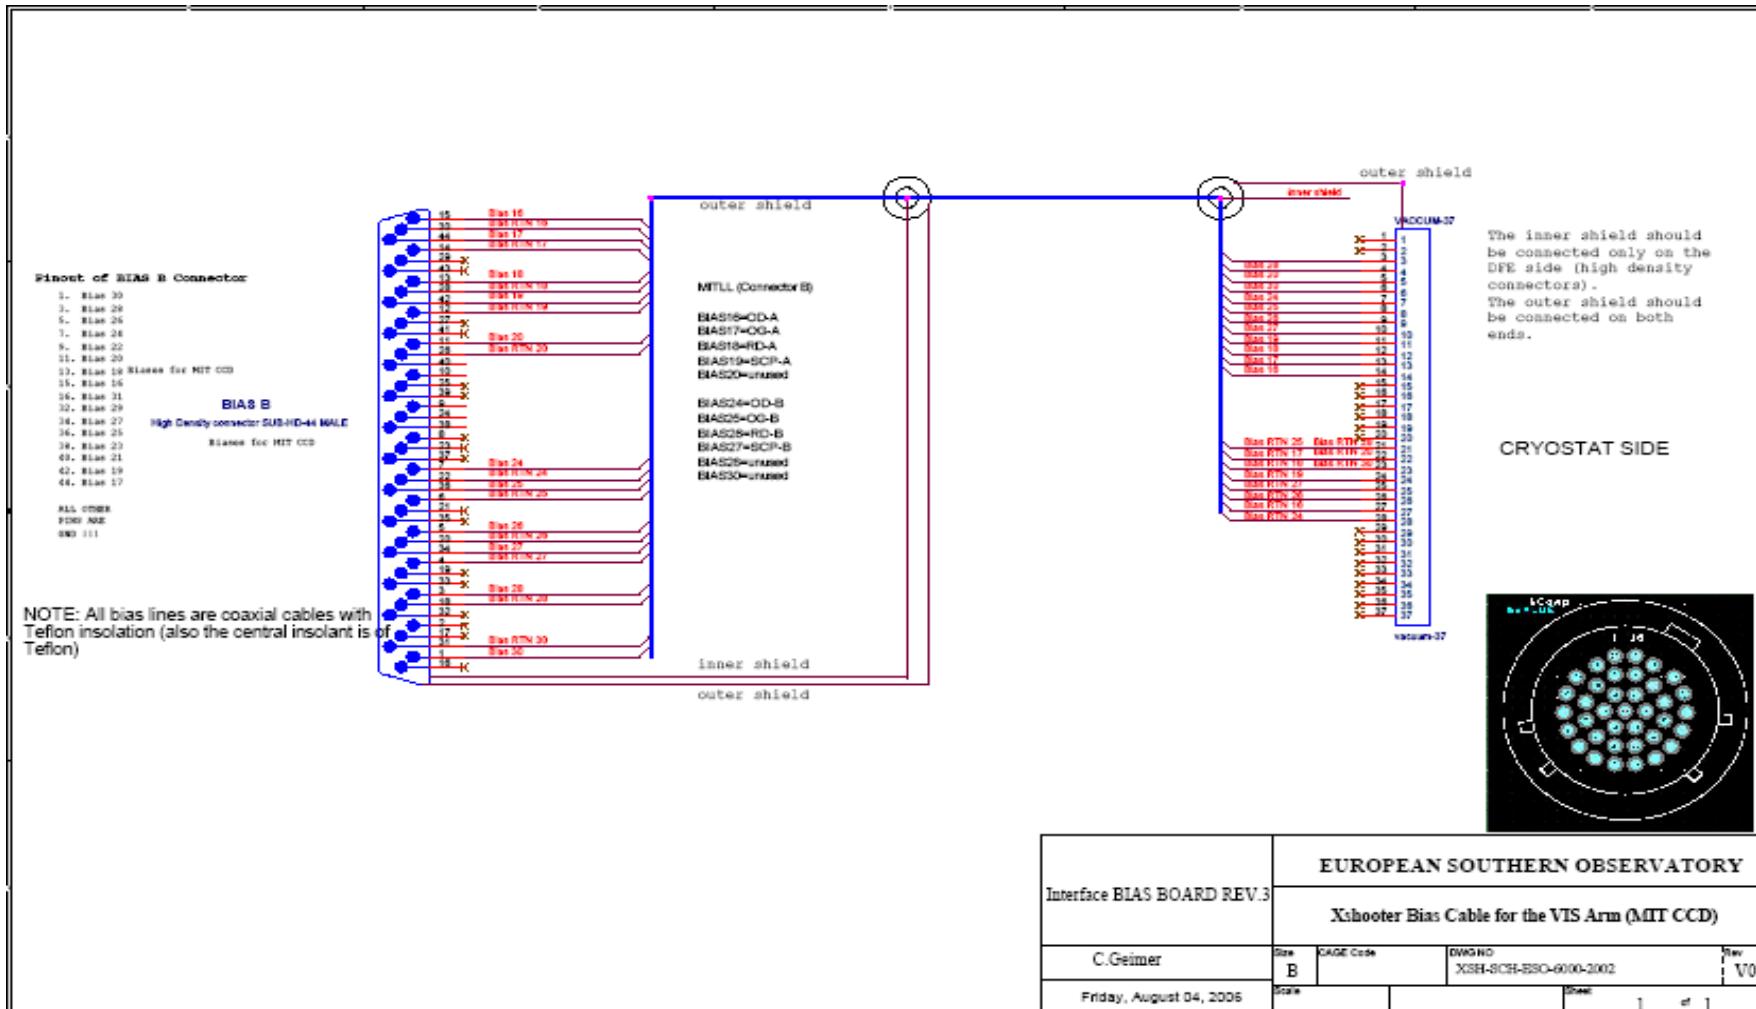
Schematic and assembly; VIS CCD Bias Cable (W21).
